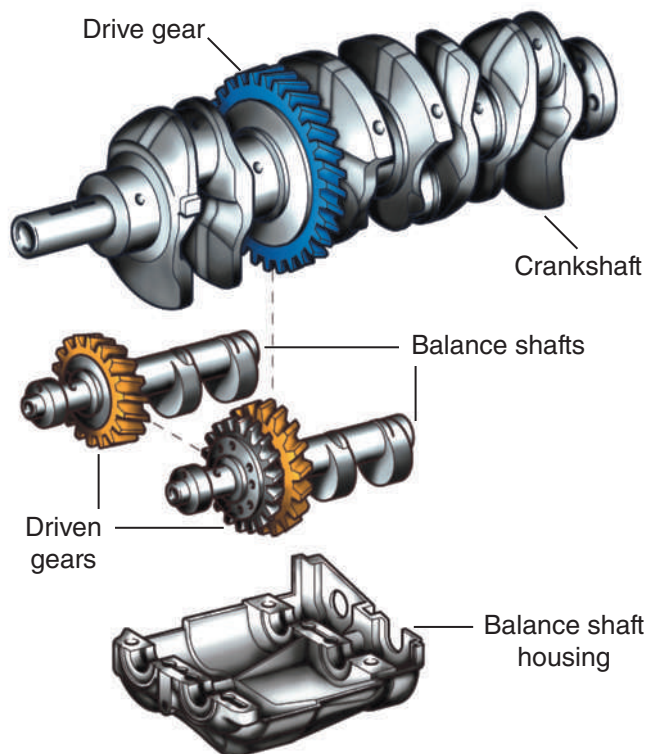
Balance shaft assemblies for a four-cylinder engine.
